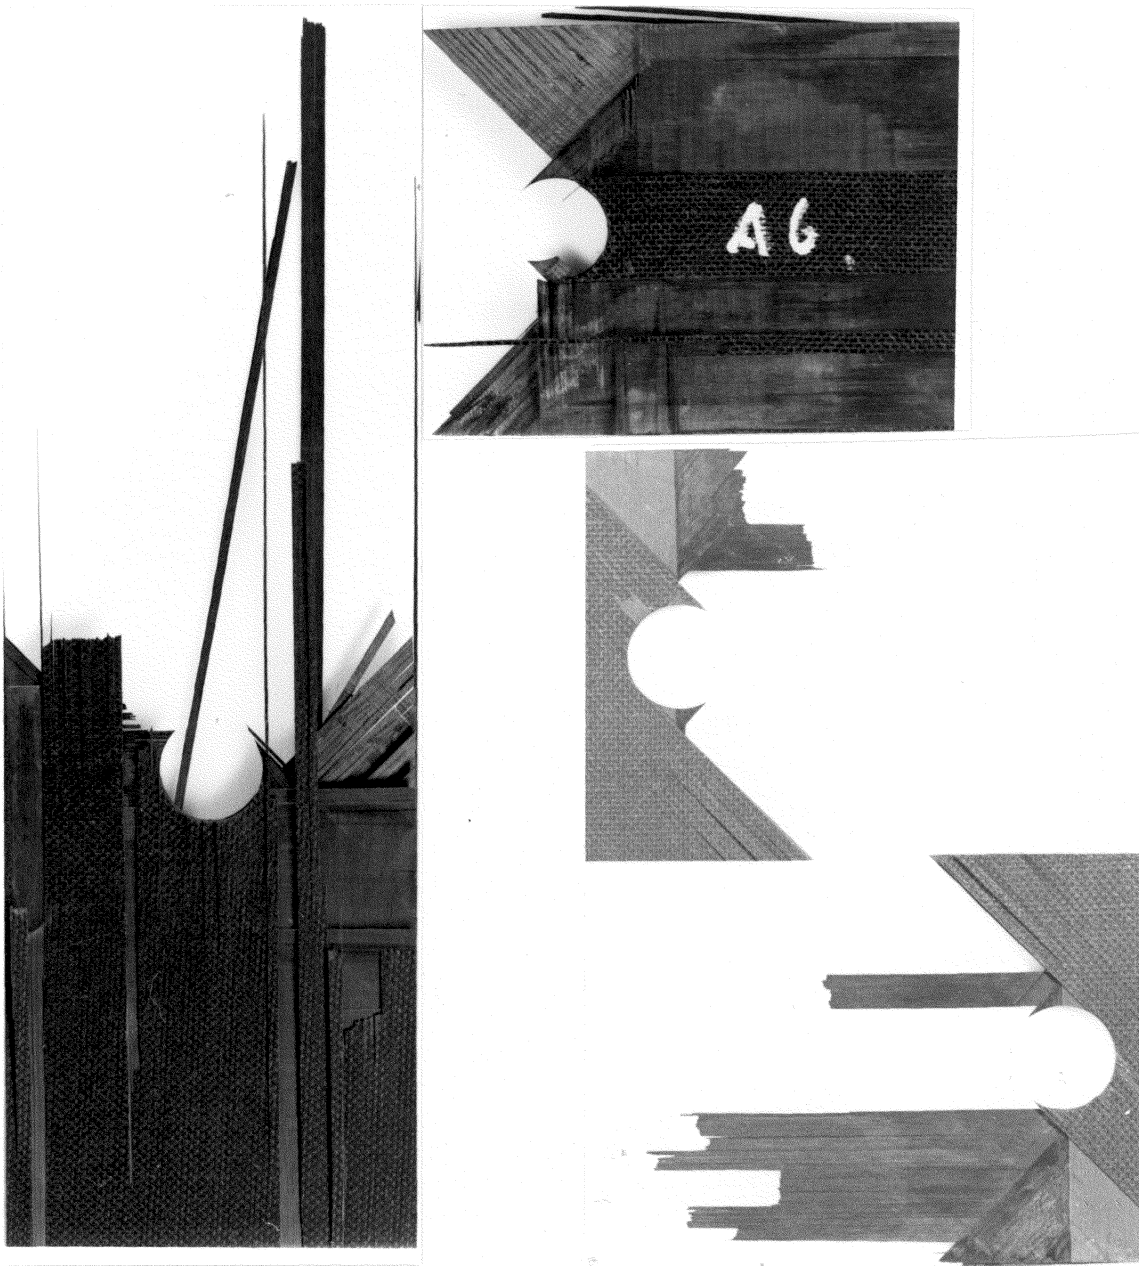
Fracture Surfaces of High Stress Level Fatigue Specimen
